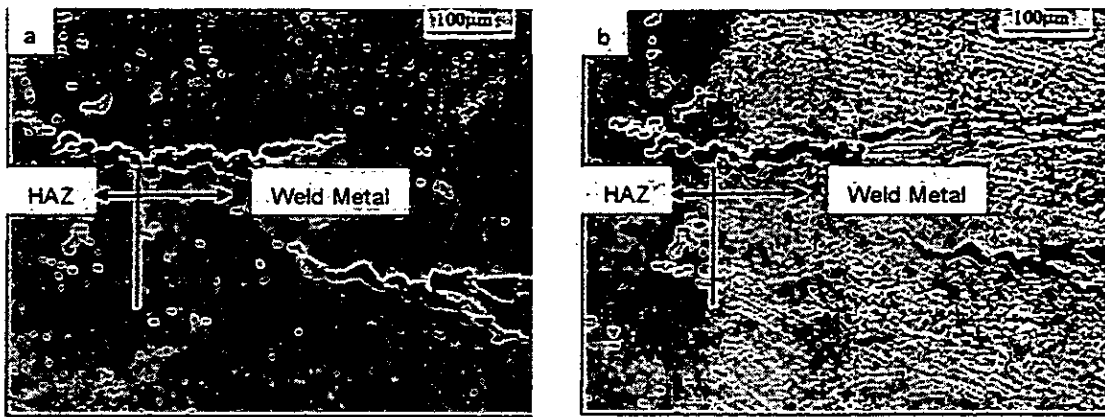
Features of cracks observed in the IN738 GTA weldment ; (a) before and (b) after etching
